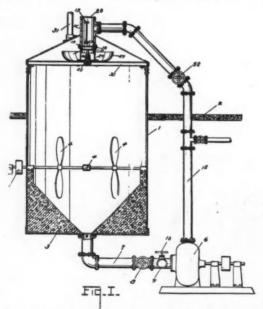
Shows Herrbold Paper Treating Machine Attached to Bleach Tank
